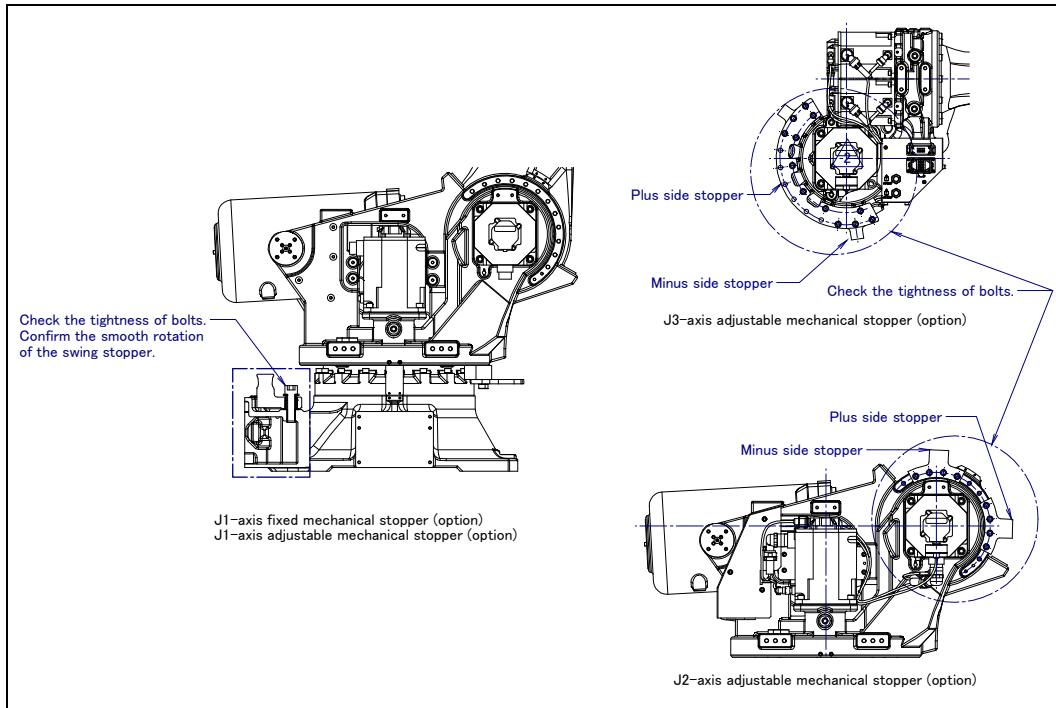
Check of fixed mechanical stopper and adjustable mechanical stopper
